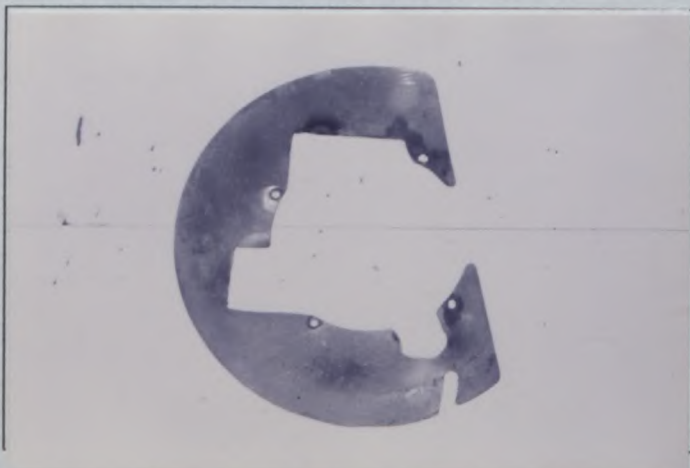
PROTECTION SHIELD FOR DISC
